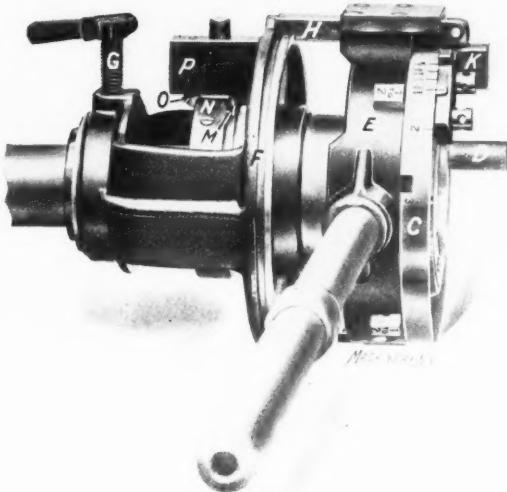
Side View of Pipe Die-stock, showing Frame, Leader Ring and Graduations on Side of Cam Plate.
